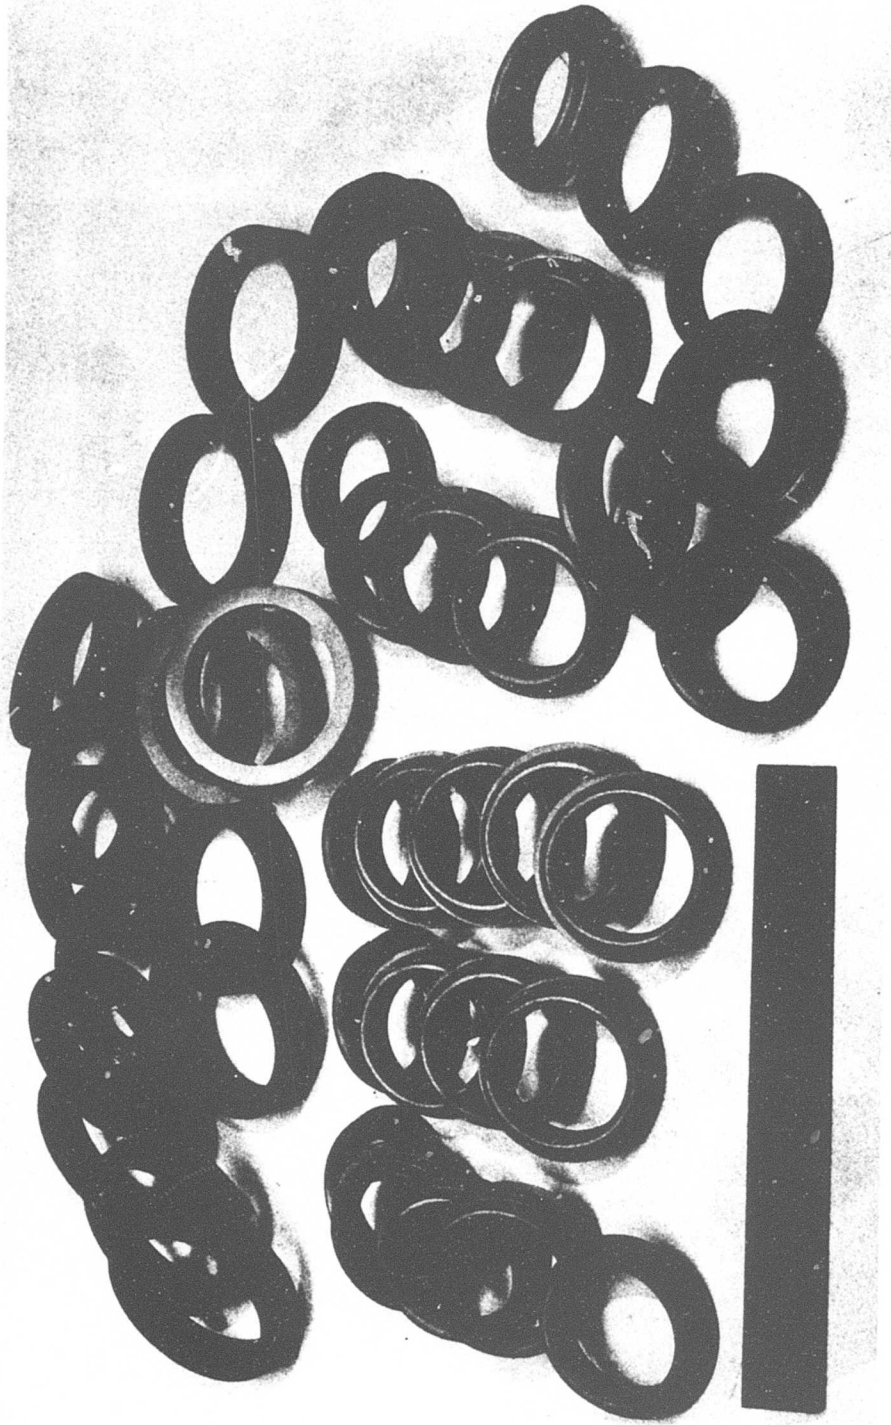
Production Lot of Semifinish Machined Ausforged 35MM Inner and Outer Rings
